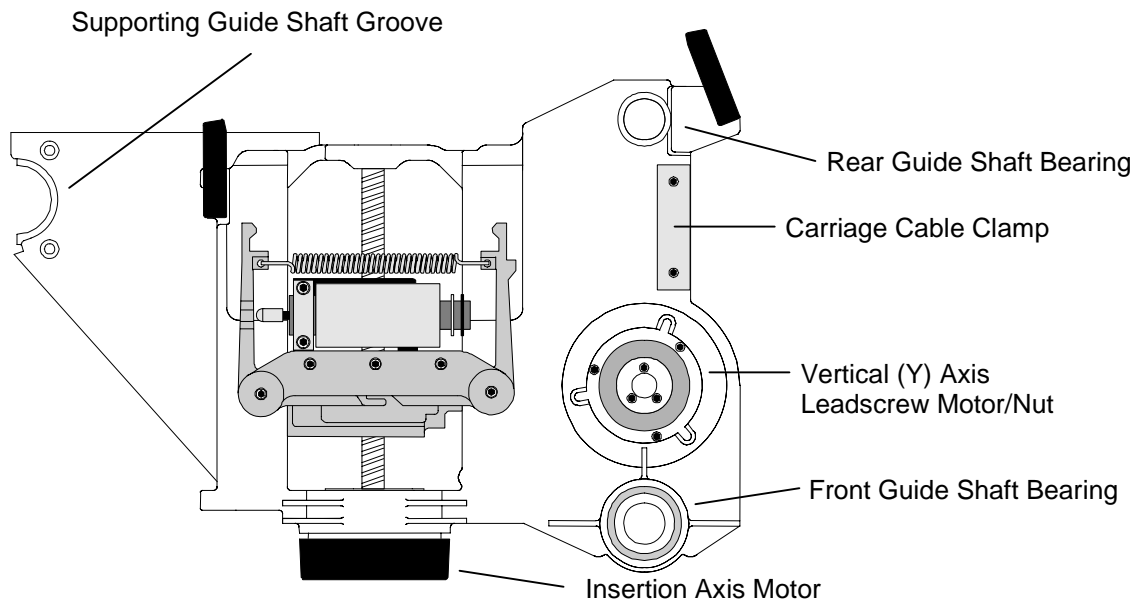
The TLS-412300/600 Carriage Assembly (P/N 500650-02-3)
